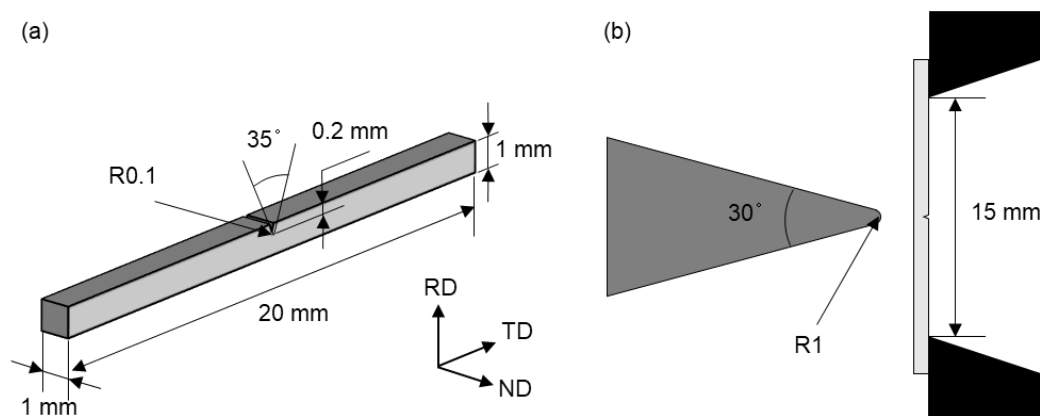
Schematic illustration of (a) specimen shape and (b) the impact test geometry and blade shape.
